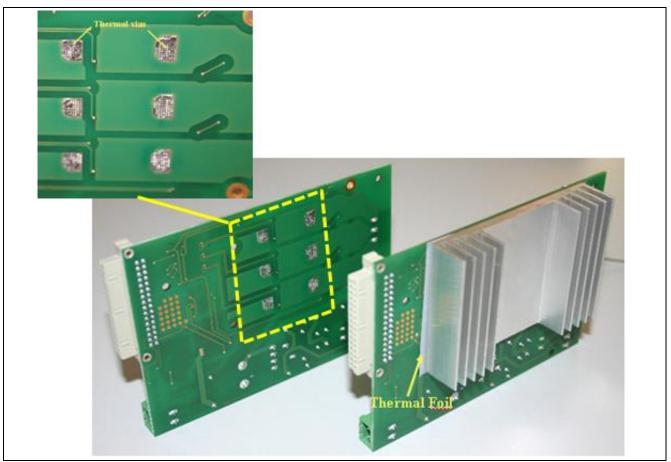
Example of thermal vias and heatsink mounting for RC-D and RC-DF test boards
